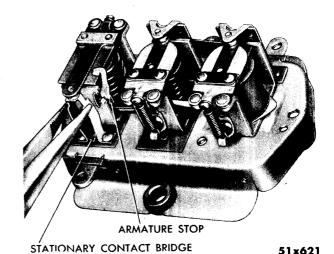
Adjusting Cut-Out Relay Contact Clearance
